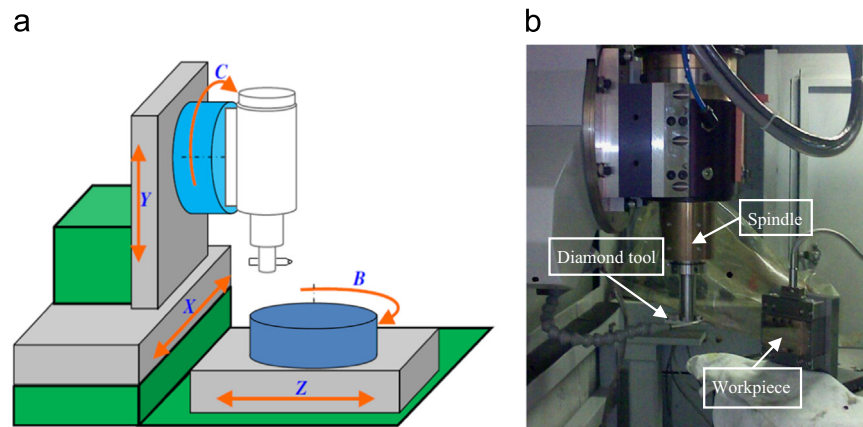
Schematic diagram of freeform 705G machine (a) and the experimental setup for groove cutting (b).
